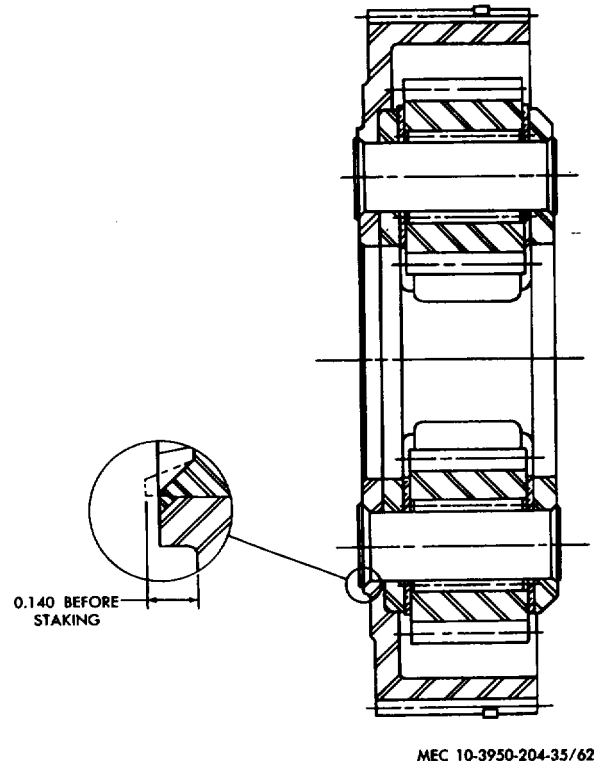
Reverse planetary carrier assembly, cross section, showing pin dimensions.
